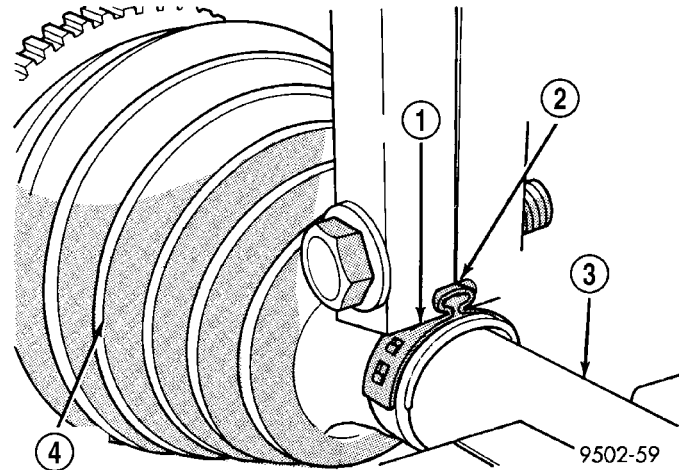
Sealing Boot Retaining Clamp Installed - Typical
